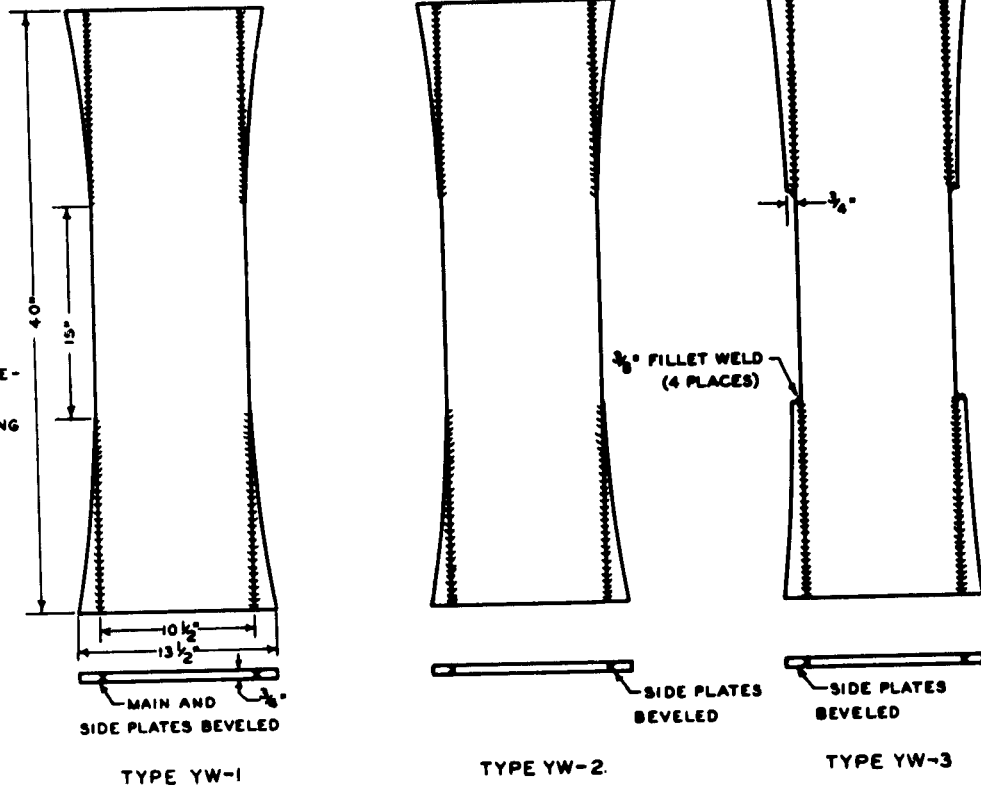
SPECIMENS WITH LONGITUDINAL WELDMENT
